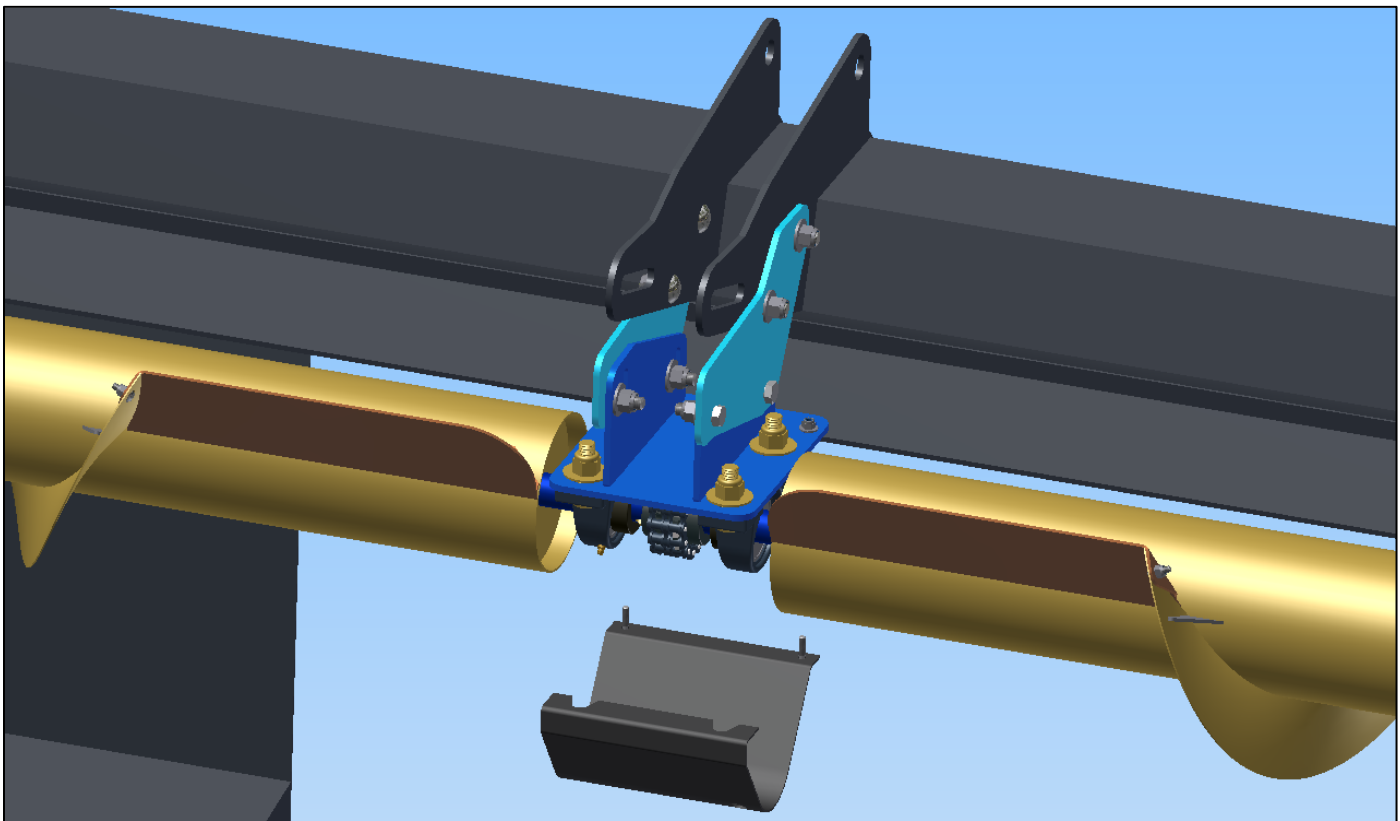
CENTER AUGER MOUNT WITH PLASTIC COVER REMOVED
